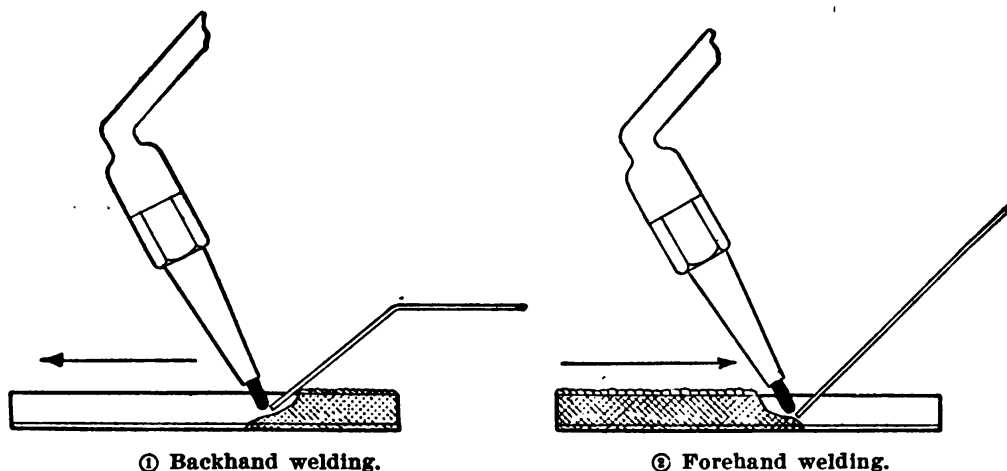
Methods of welding with the oxyacetylene torch.
